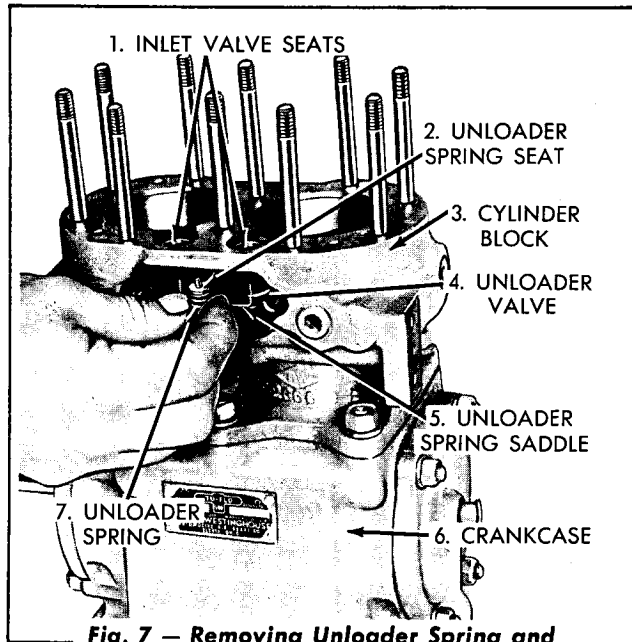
Removing Unloader Spring and Spring Seat from Cylinder Block
